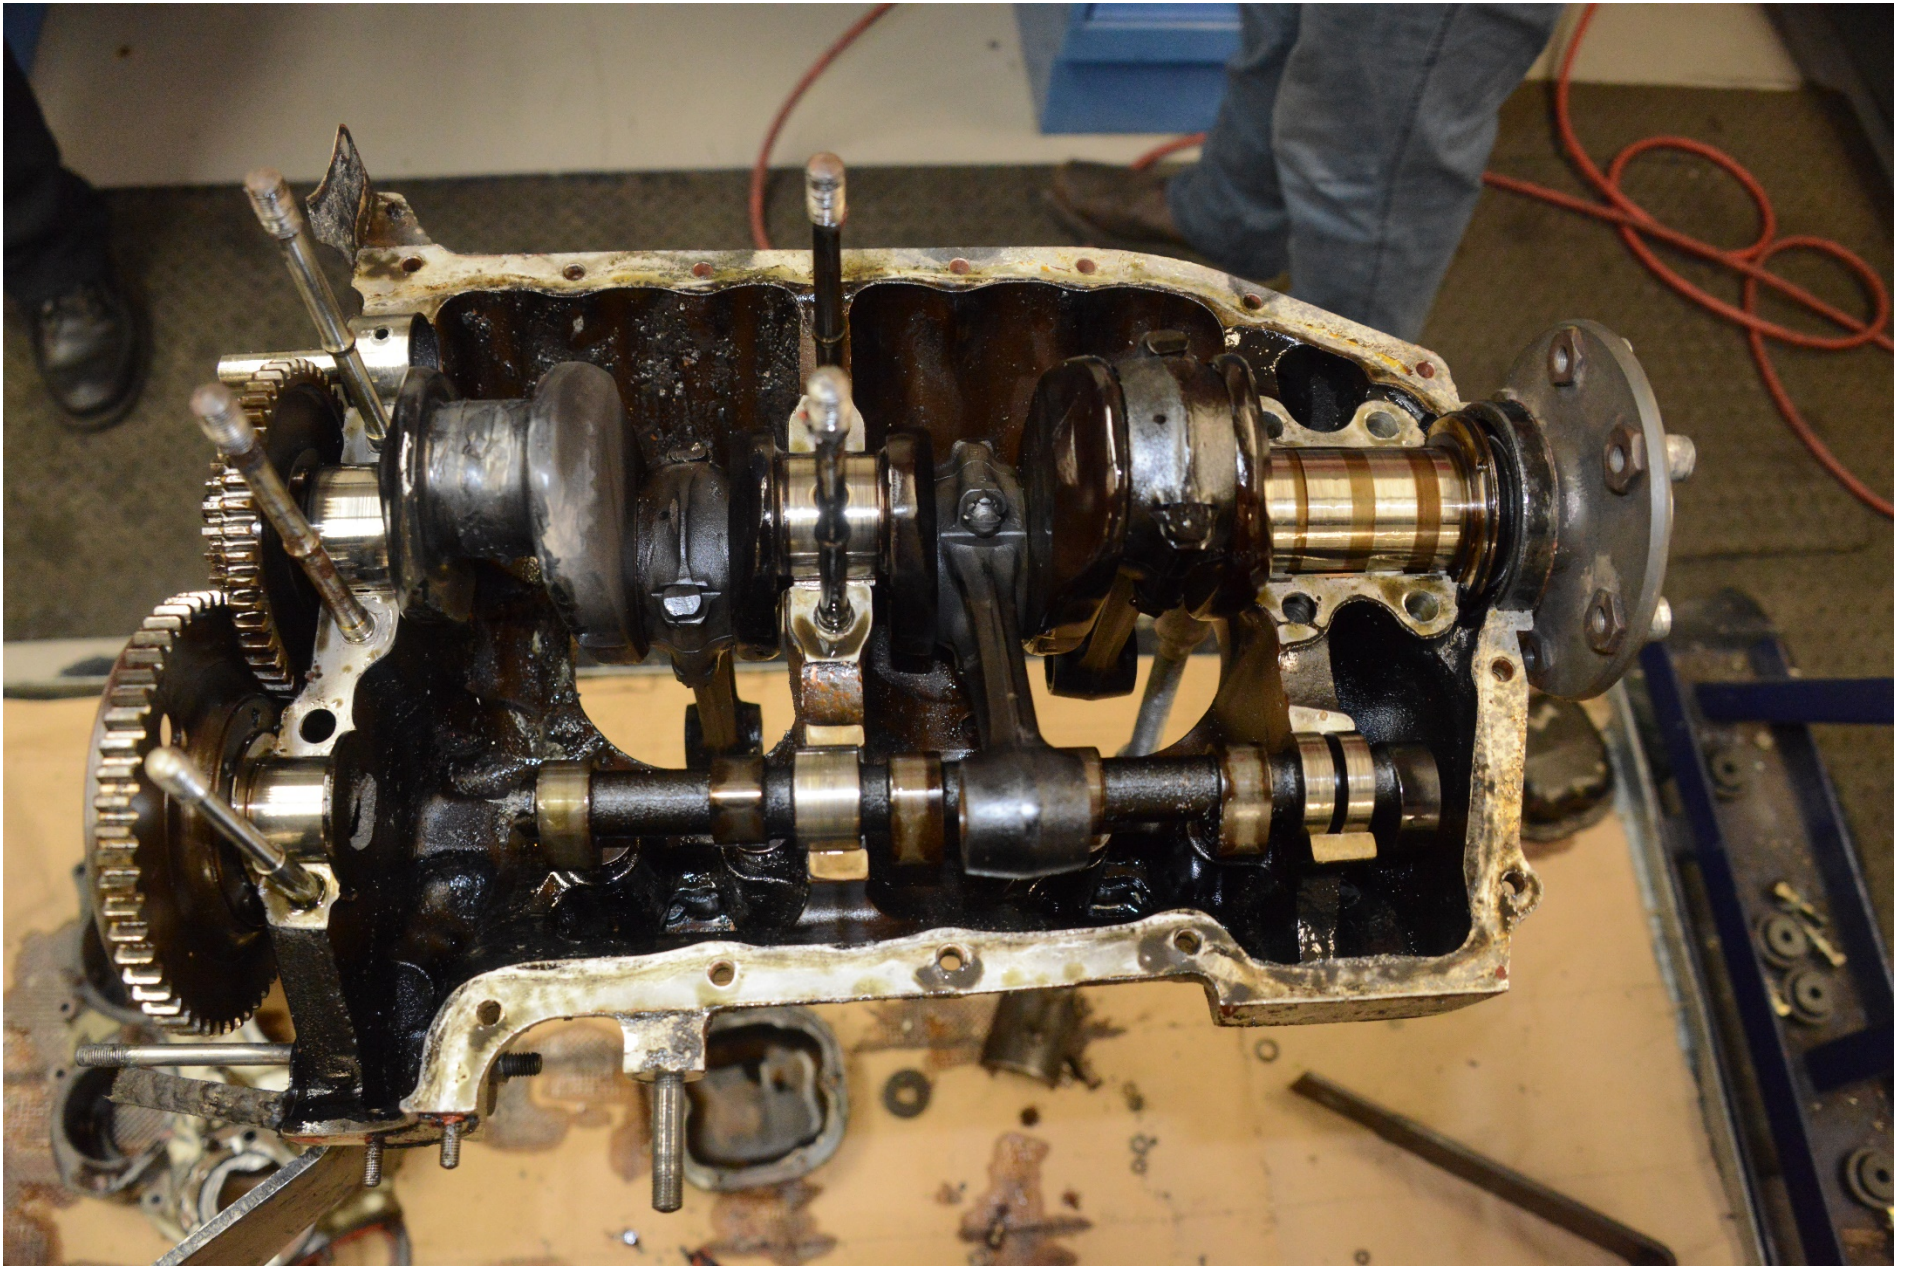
View of the crankshaft and camshaft in half of the crankcase.
